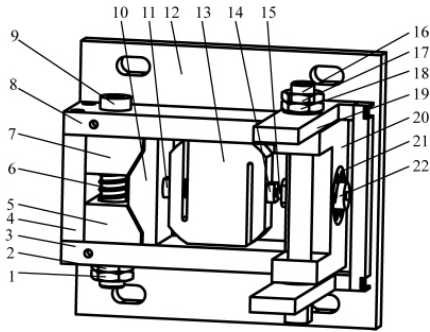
Structure of the radial loading device (the front board and the fan are removed)
